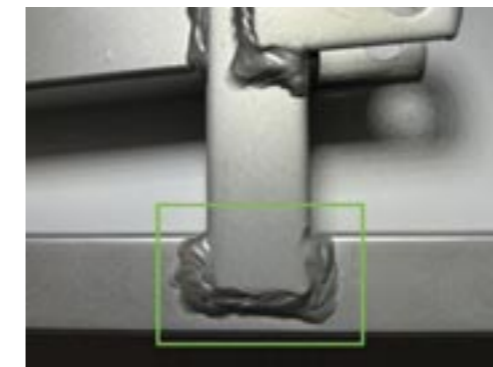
A crack on the vertical face of the Bolton MRT stretcher handle. The crack is in the 304 grade stainless steel square section tubular at the foot of the weld.
